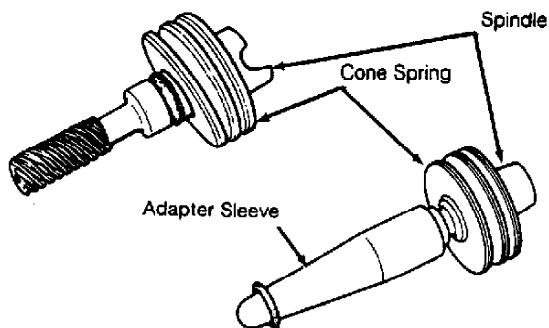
Installing Spindle "O" Ring Using Adapter Sleeve (Loyale)
